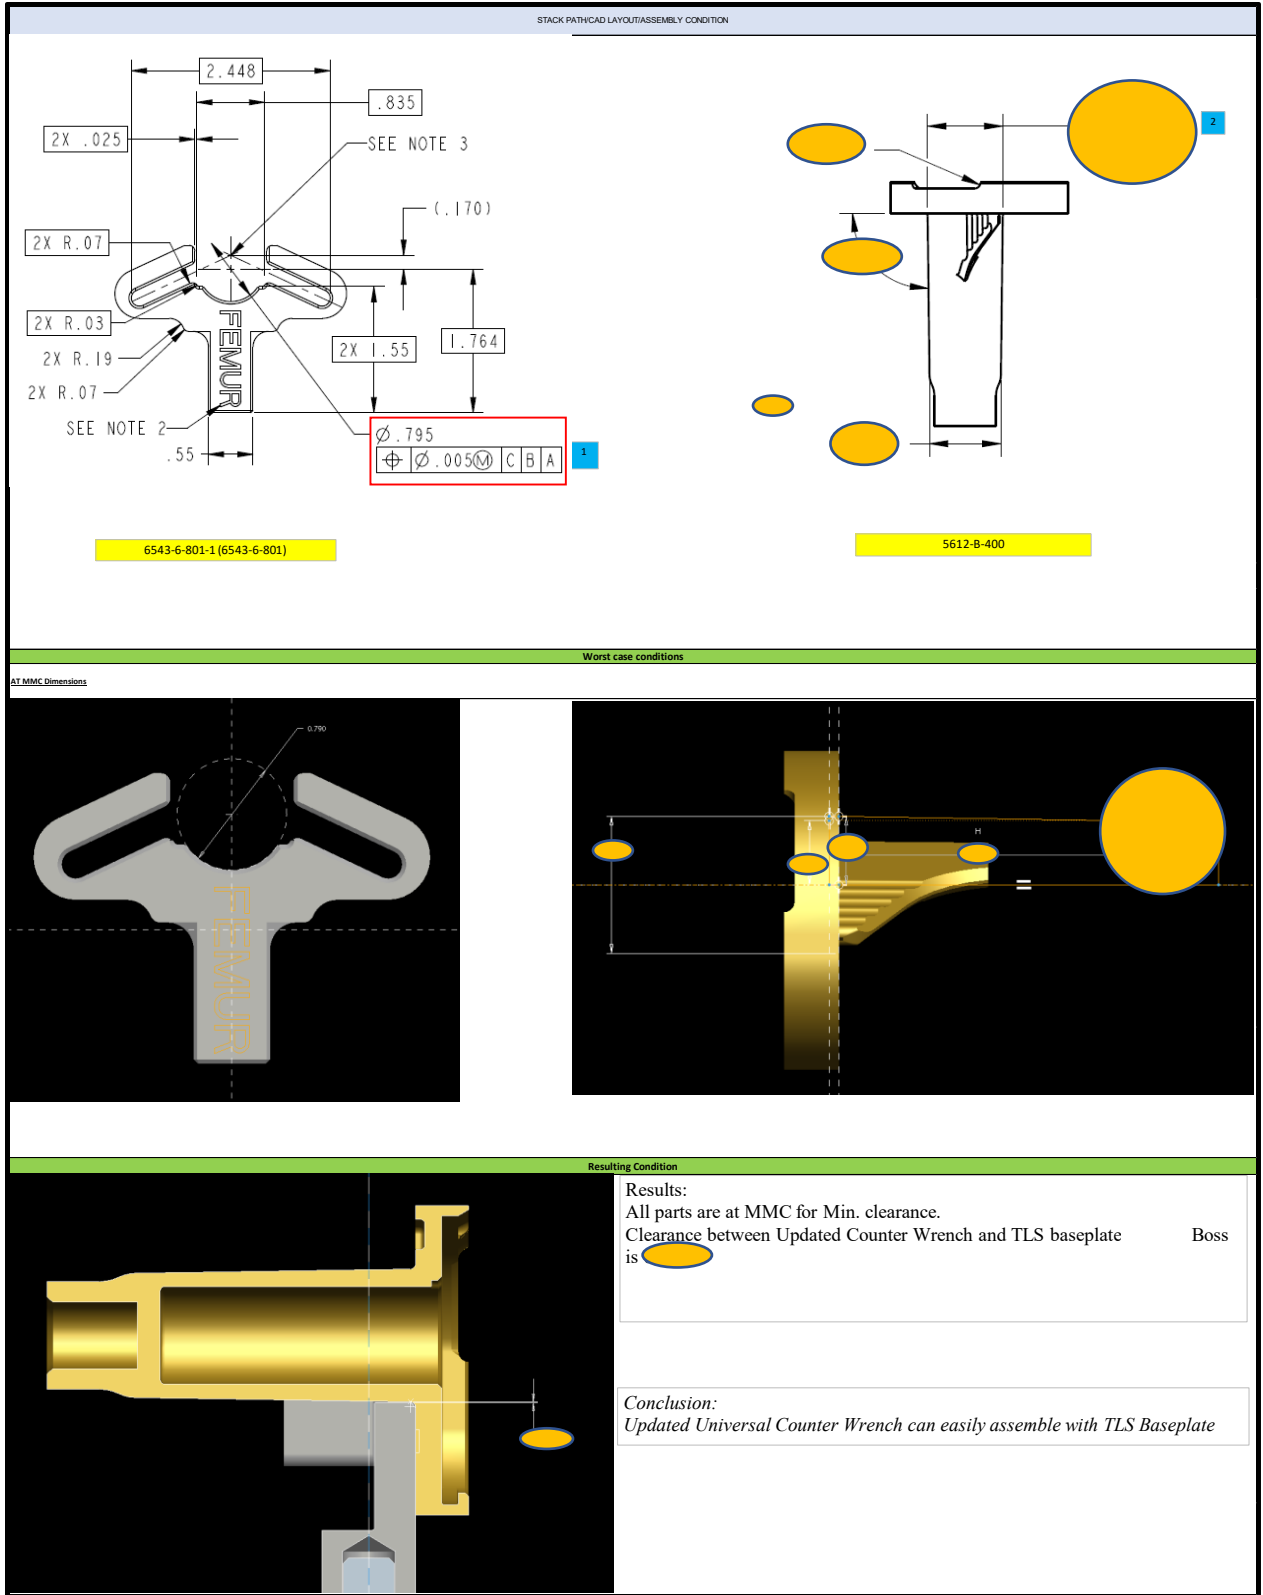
Assembly of Universal Counter Wrench with TLS Baseplate size 8 (Tolerance report T03XXX)
